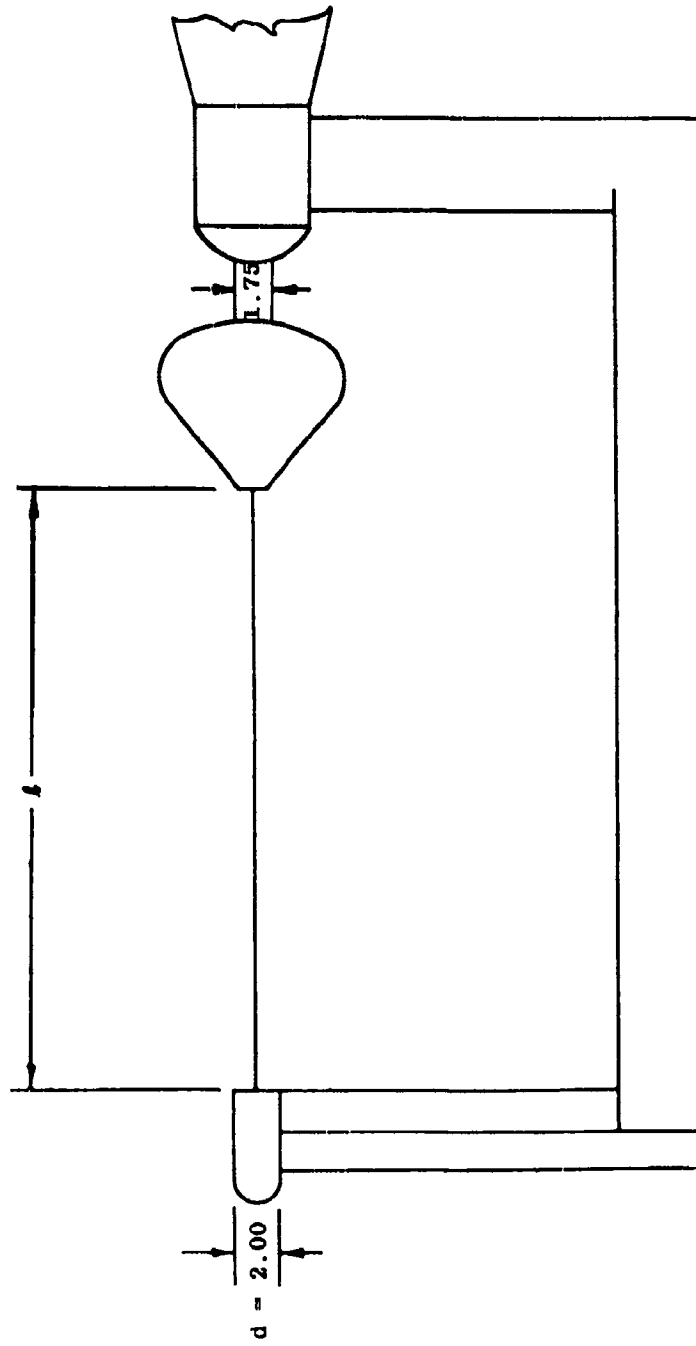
Model Support Assembly for the Pressure and Heat Transfer Models
